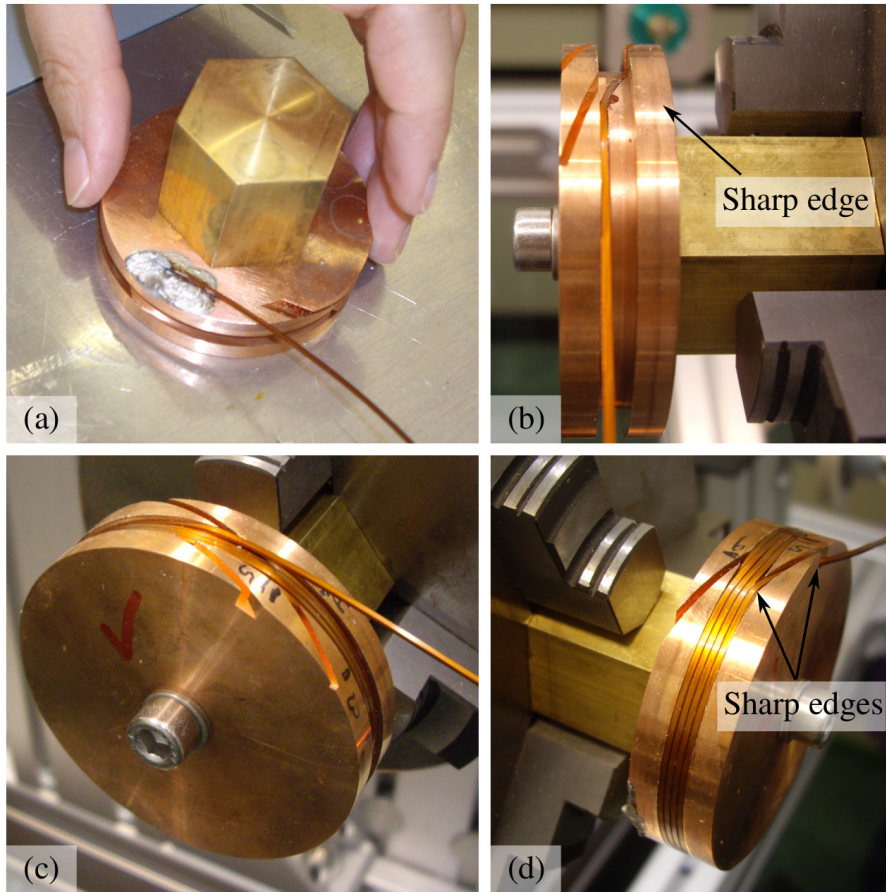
Coil winding of the first short prototype: (a) solder sc wire, (b) start of the winding, (c) end of the fifth layer and (d) sharp edges at the winding end.
